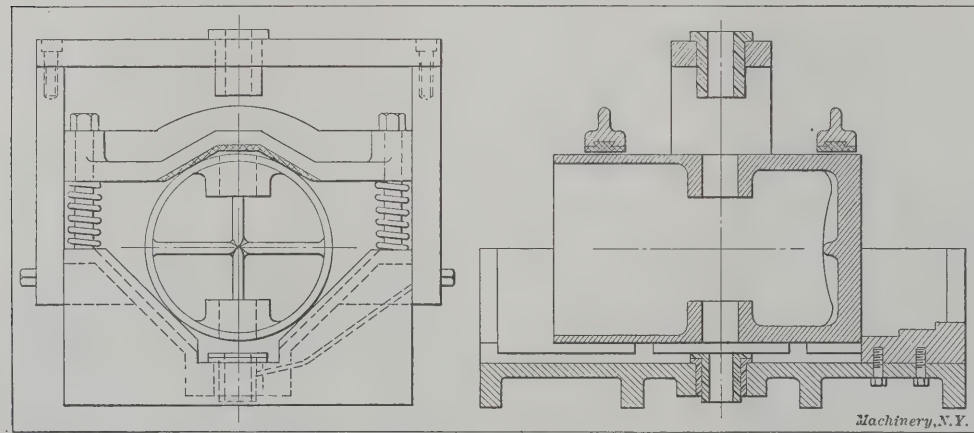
Elevation and Section of Jig for Piston Boring with Work in Place
